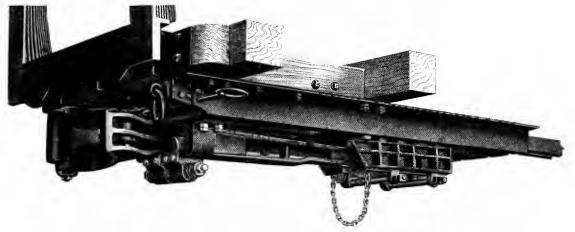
Gould Steel Platform with Friction Buffer and Draft Gear.
